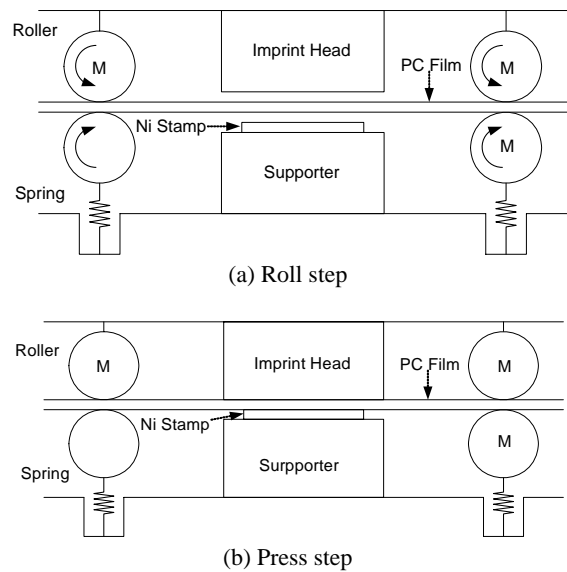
Conceptual Description of RNP Type Hot-Embossing Machine
